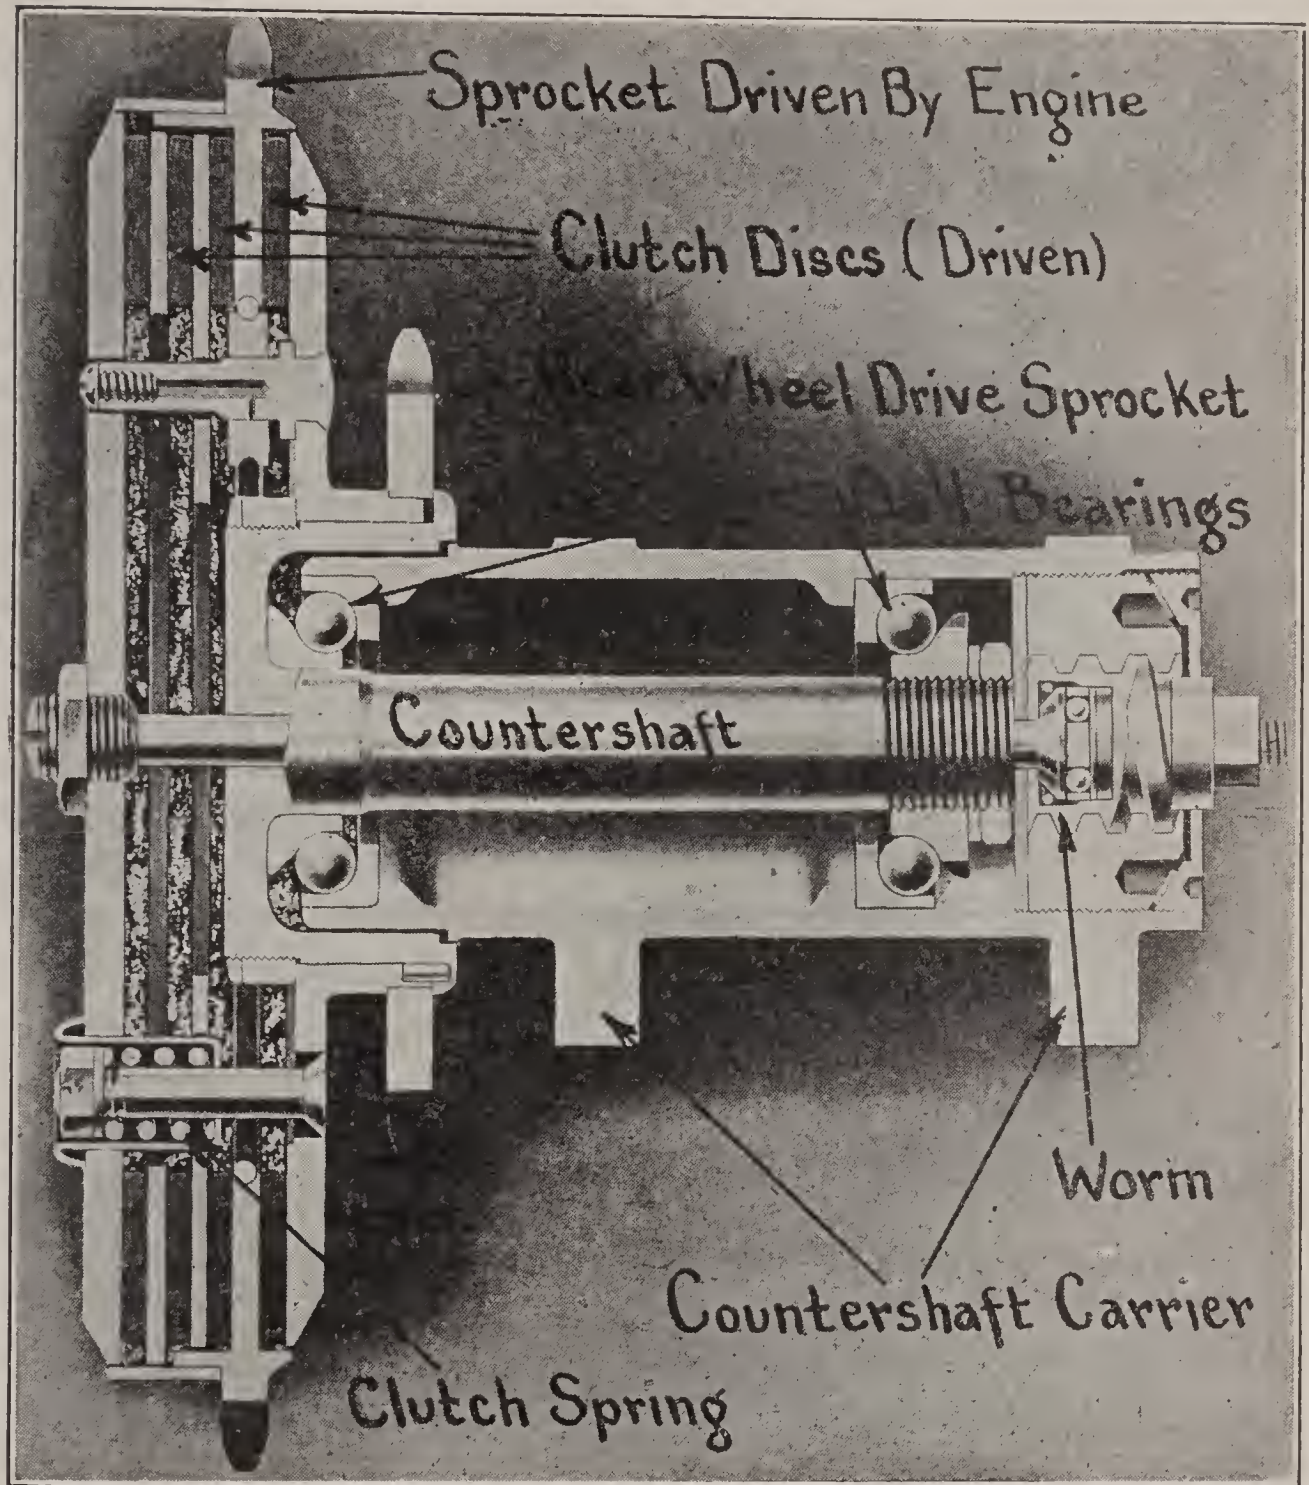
Countershaft Type Multiple Disc Clutch Used on Indian Motorcycles.
